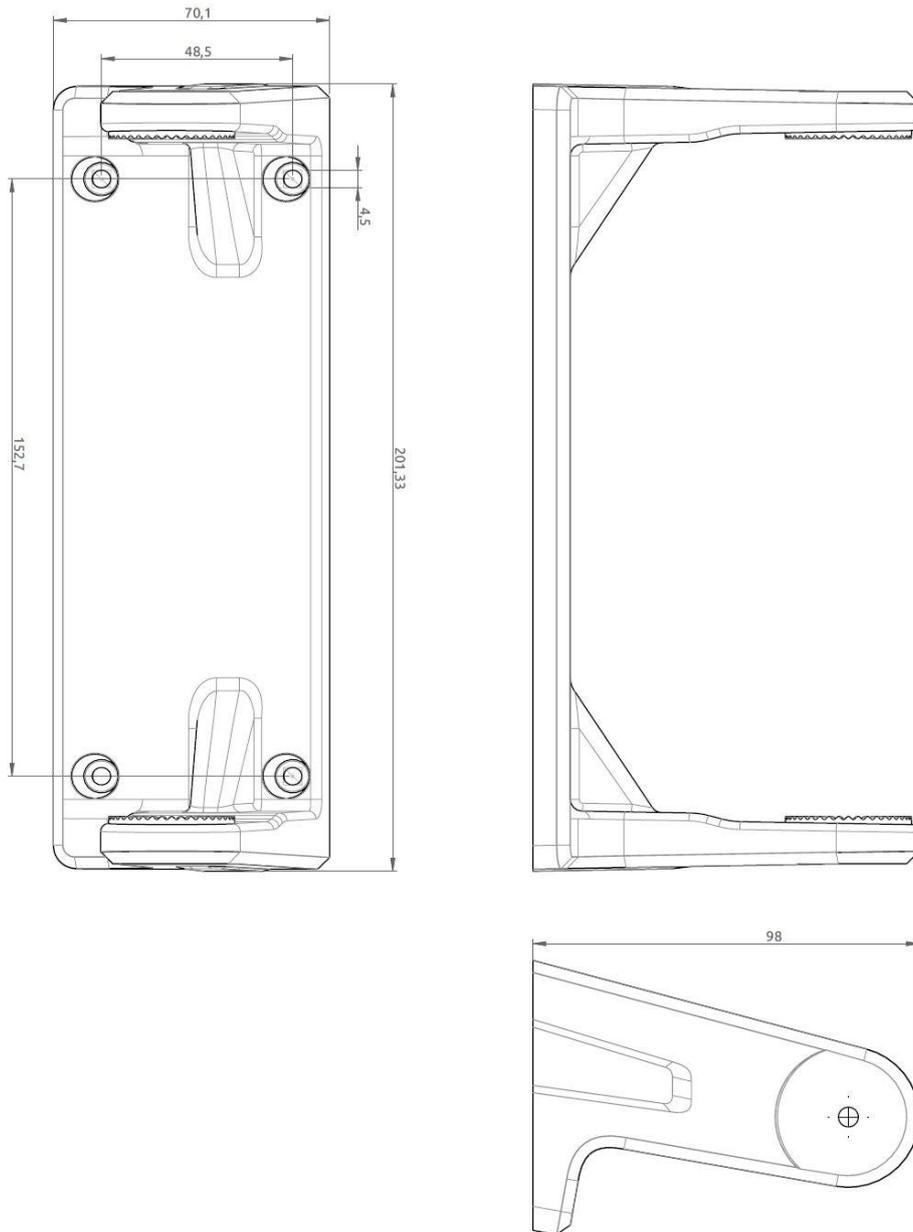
Outline Drawing: Bracket Mount, Control Unit
